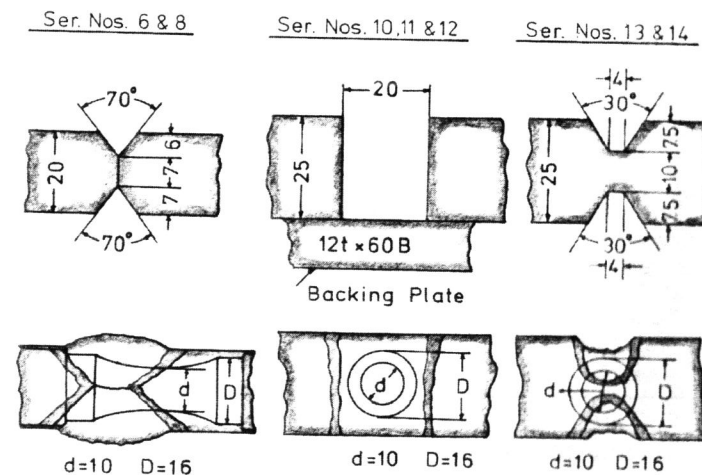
Edge Preparations and Locations of Test Specimen in Welded Joint
